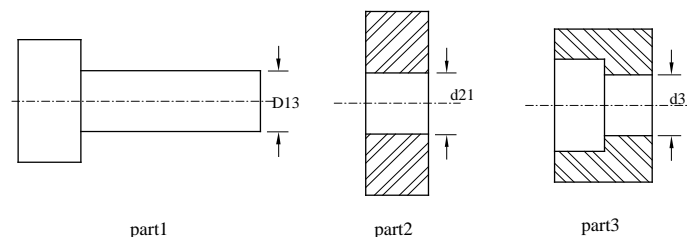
Diametrical dimensions to be controlled in the parts in figure 4(a)
